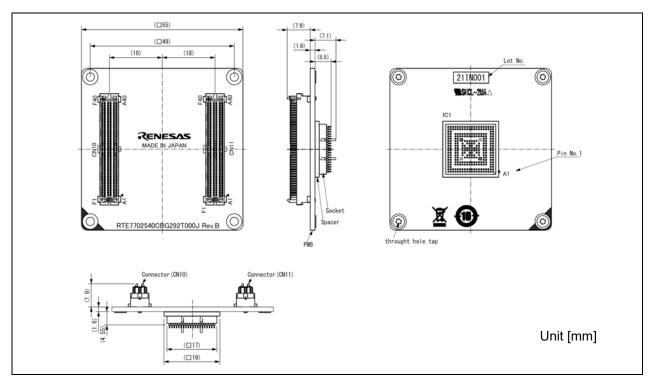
Dimensions of the RTE7702540CBG292T000J (292 Pins)
